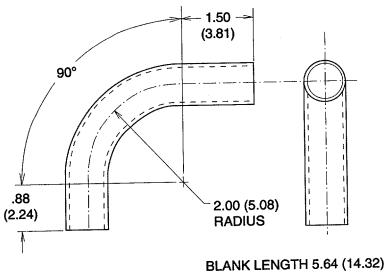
Tube Assembly, Outlet Receiver, Part Number 149K0053-1/T
